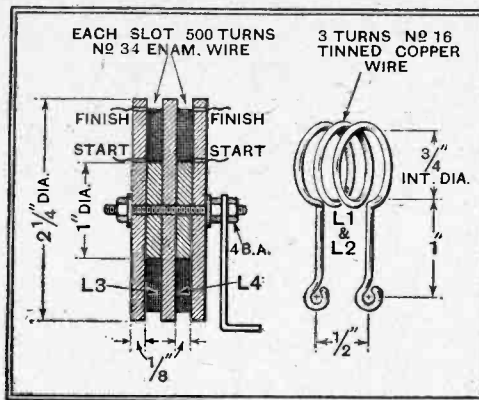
Dimensional drawing of former for coils L3 and L4, also details of small tuning coils L1 and L2.
